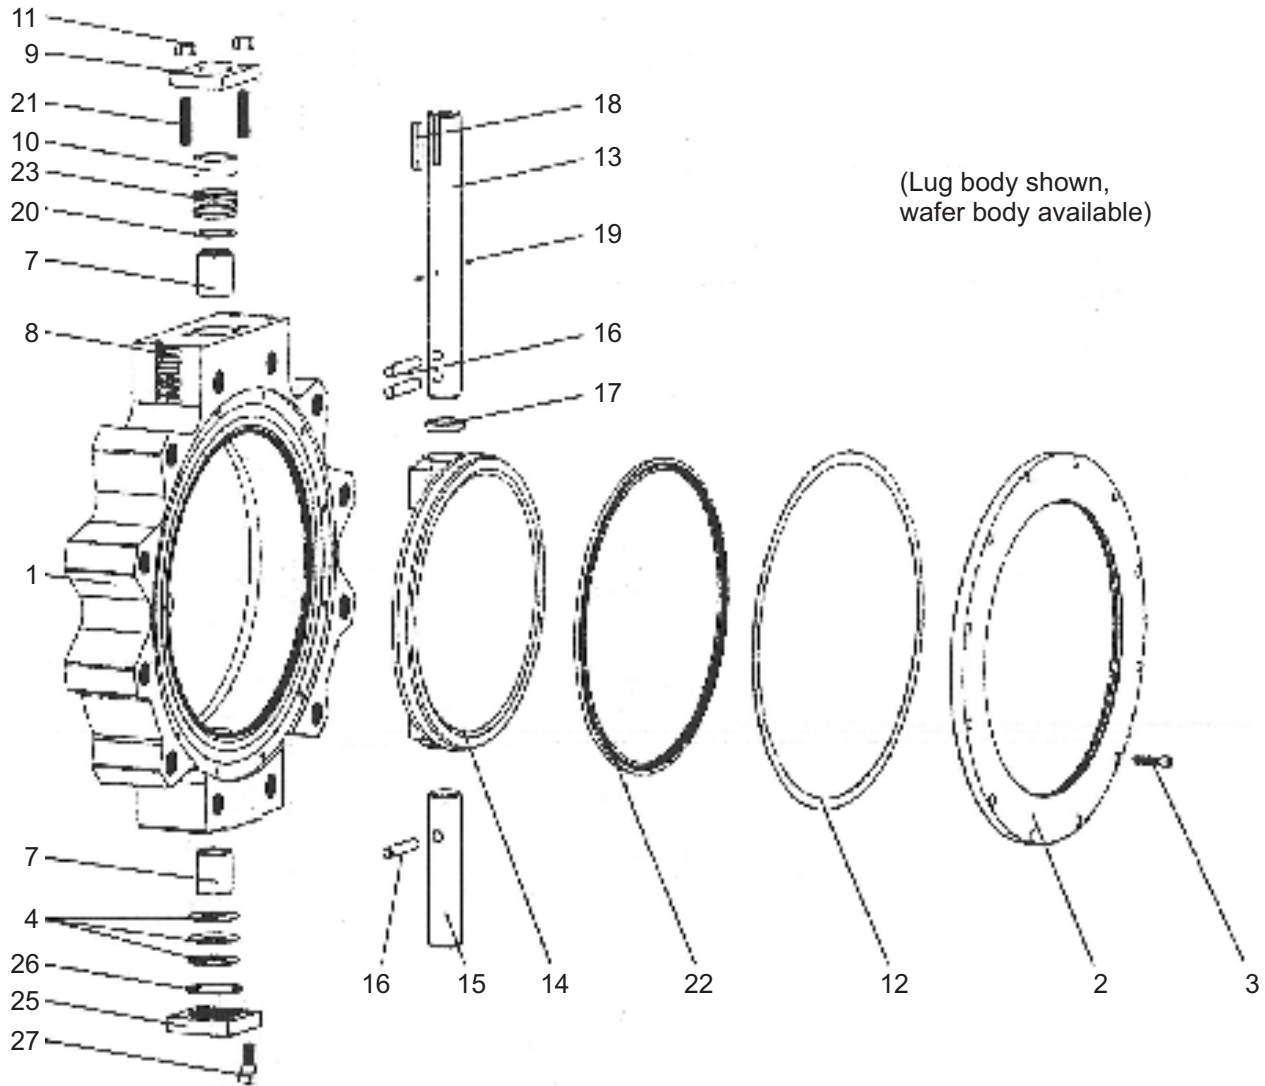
Cameron Valves' WKM 14" - 30" Class 150, 12" - 24" Class 300, 10" - 12" Class 600 DynaCentric Butterfly Valve Components.
